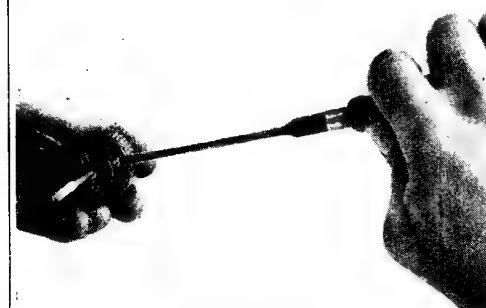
In this case a grub screw is used to hold the spindle in the knob. The screw is fitted at right angles to the line of the spindle
